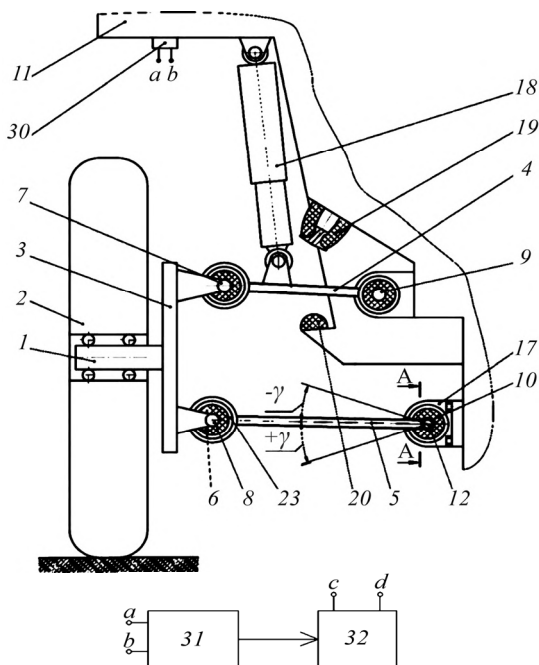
Scheme of the suspension of the vehicle with MRA: 1 – axle; 2 – wheel; 3 – rotary fist; 4 – upper lever; 5 – lower lever; 6 – MRA; 7 – 10 – axes; 11 – spring-loaded housing; 12 – torsion shaft; 17 – bracket; 18 – hydraulic shock absorber (HA); 19, 20 – stops; 23 – MRA of the CS; 30 – sensor unit; 31 – control unit; 32 – current source
